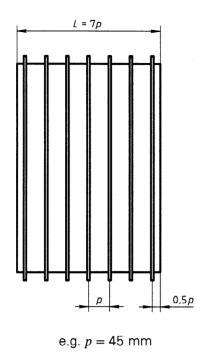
Test piece cut out of a perpendicularly ribbed pipe
